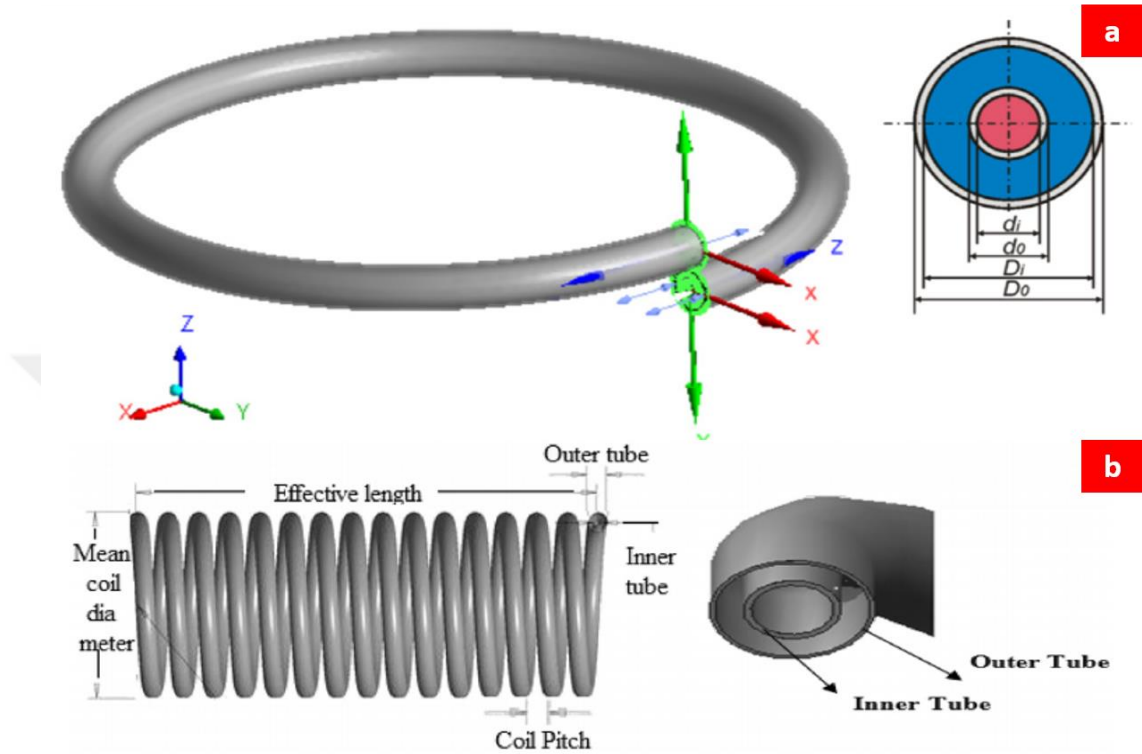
Geometry design of double pipe helical tube (a) Single section and (b) Full tube [55].
